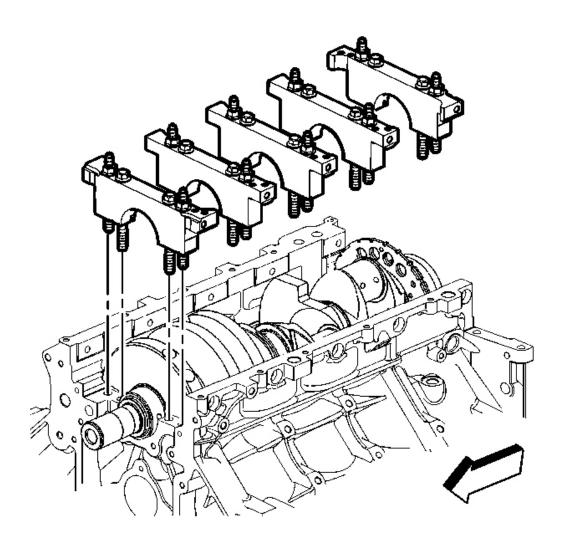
View Of Crankshaft Main Bearing Caps Courtesy of GENERAL MOTORS CORP.
